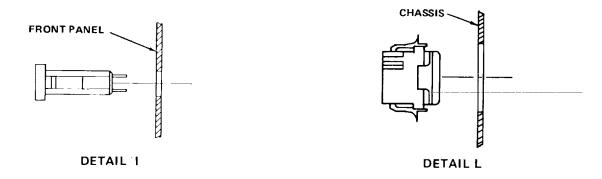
VOR Local Control Front Panel and Chassis-Mounted Parts Location Diagram (Sheet 4 of 4)
